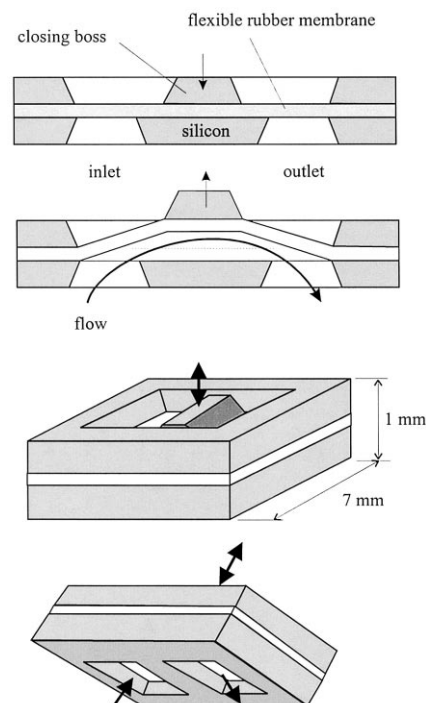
Cross-section (top) and perspective view (bottom) of the micromachined valve part.
